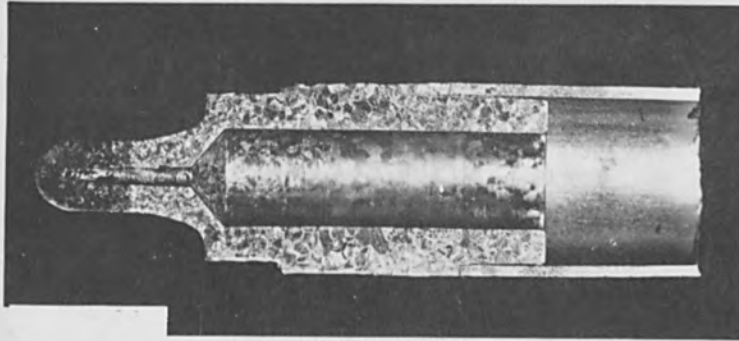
Macrosection of an inert-gas tungsten-arc weld in a nuclear fuel element.
